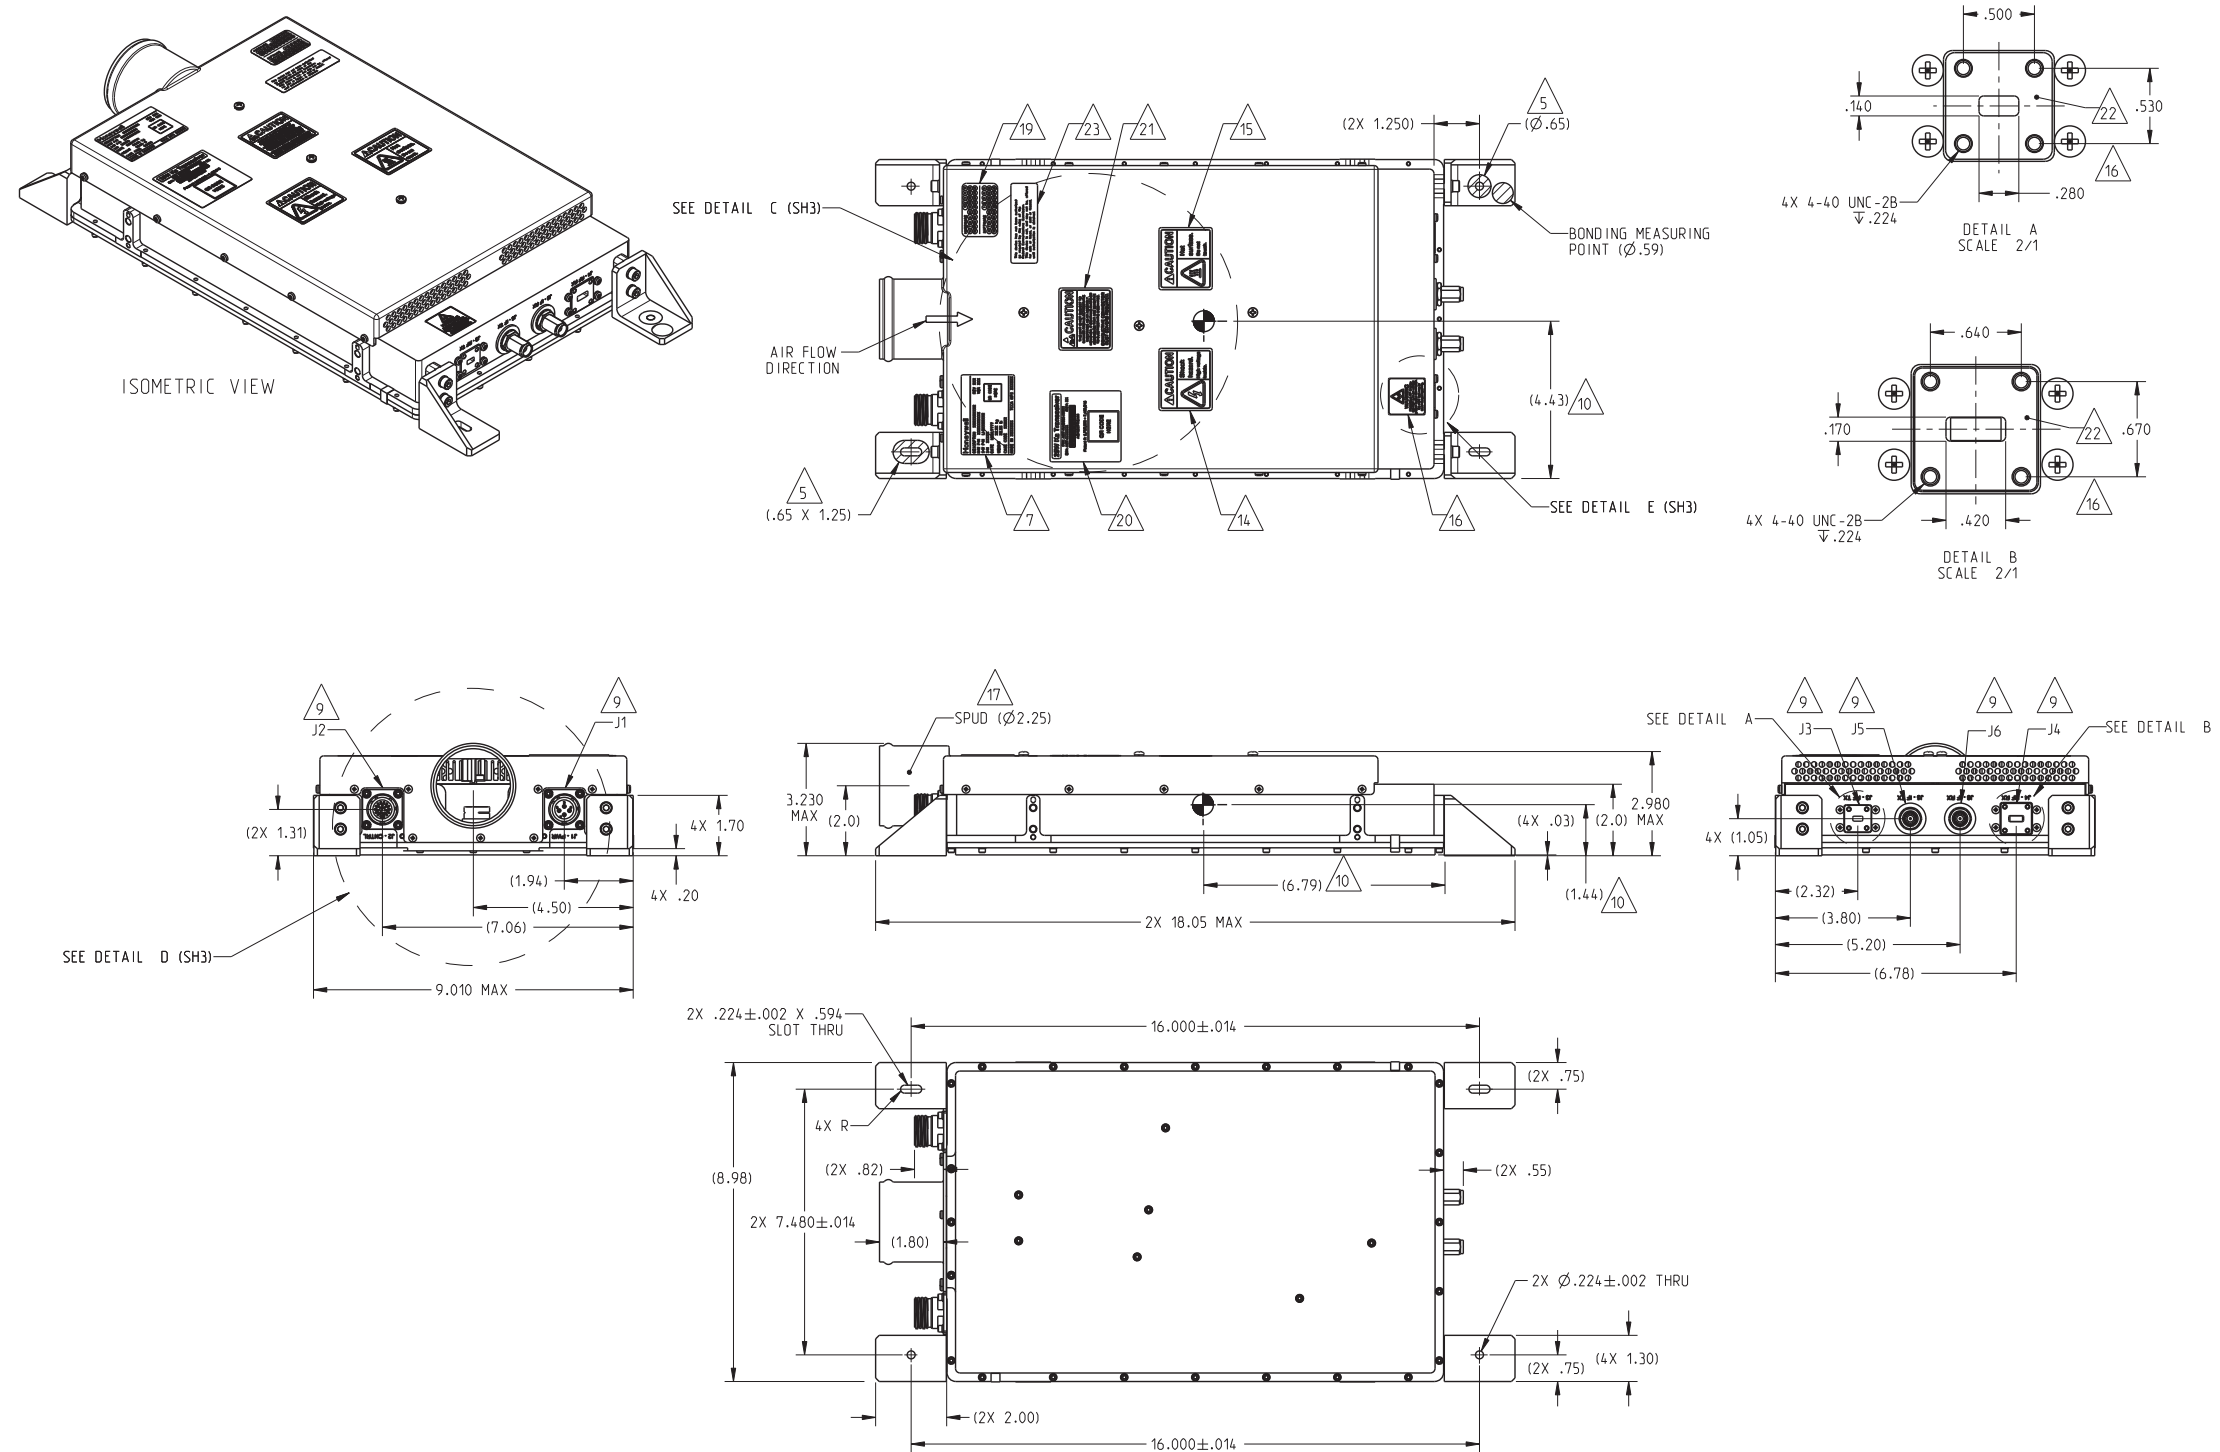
KRFU, Forced Air Cooled, Outline and Installation Drawing (Sheet 1 of 3)
